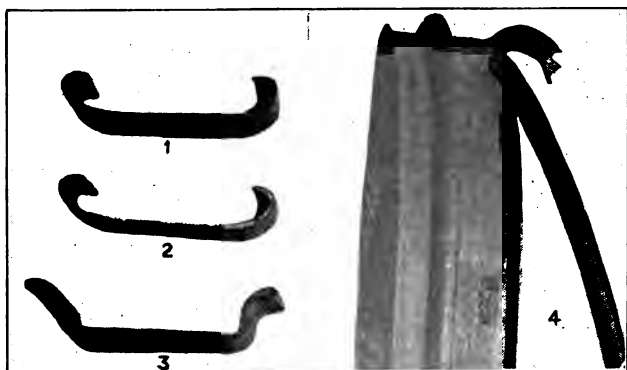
Types of rims. 1—regular clincher. 2—quick detachable. 3—straight side. 4—universal.
